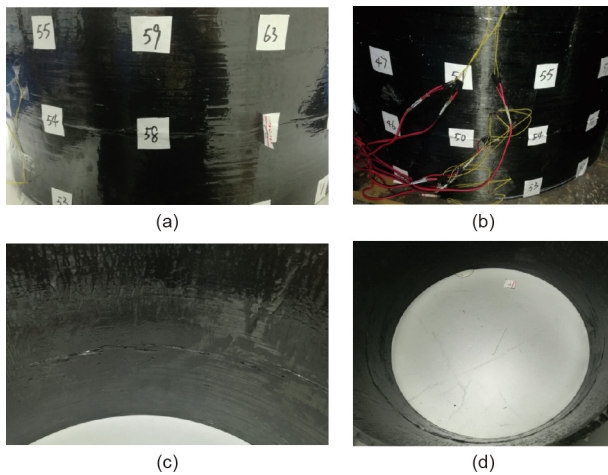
Failure mode of the CFRC CFSC. (a,b) Facesheet crushing at outer skin; (c,d) facesheet crushing at inner skin.
